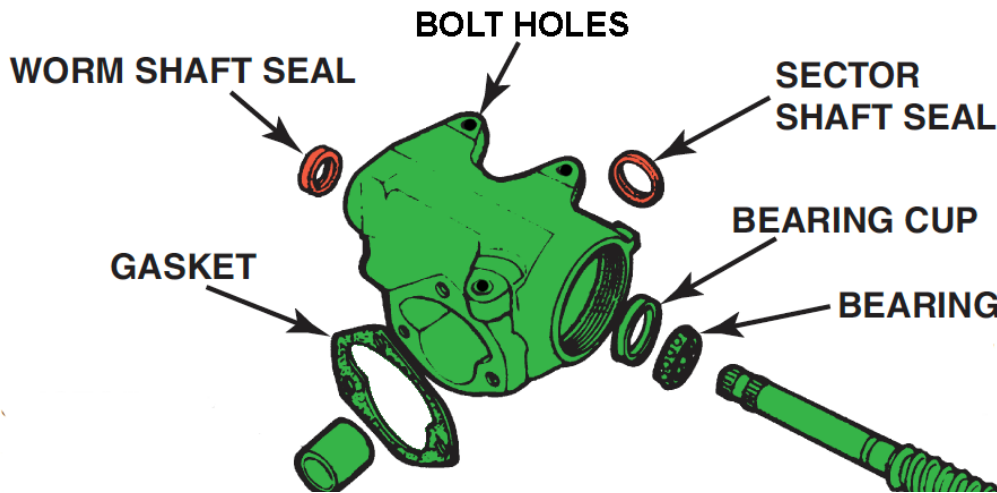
Steering gear seals, gasket, and mounting bolt threaded holes.
